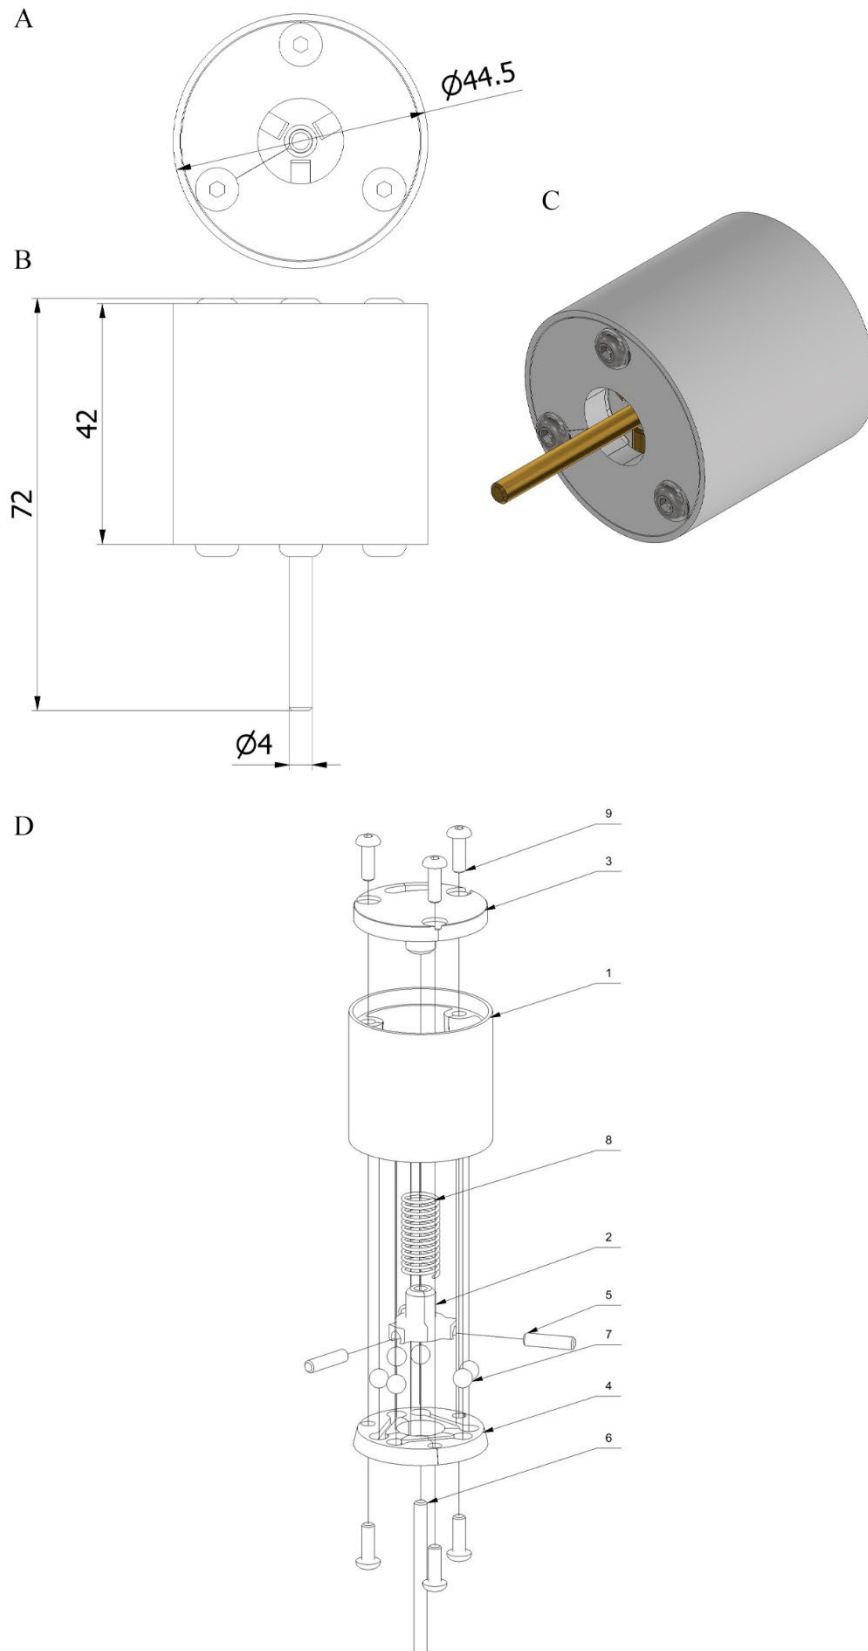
CAD model of a touch probe used to design fin. A) top view. B) side view. C) isometric view. D) exploded view of a touch probe solution. Numbers depicted in D are explained in Table 2.9. Numbers 72, 42 in A-B indicate length (mm), and case length (mm), respectively.
